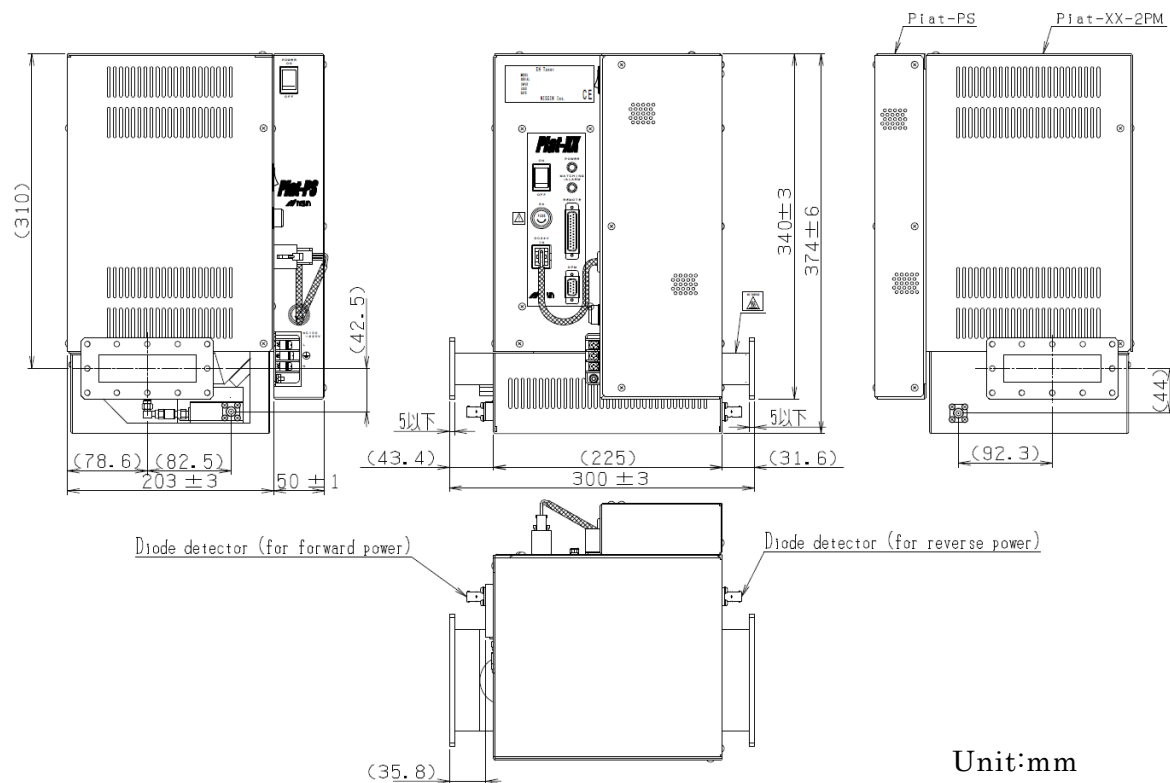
Piat-XX-2PM-CE with Piat-PS-CE Outline dimensional drawing
